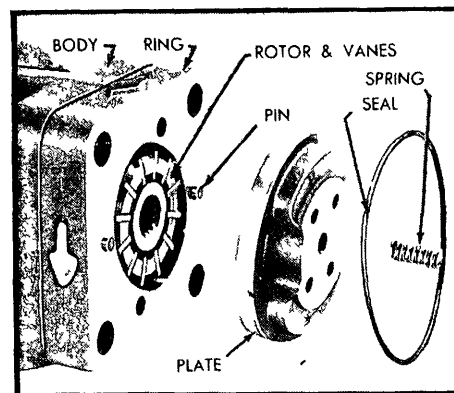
Pressure plate, ring, rotor and vanes of Vickers pump
